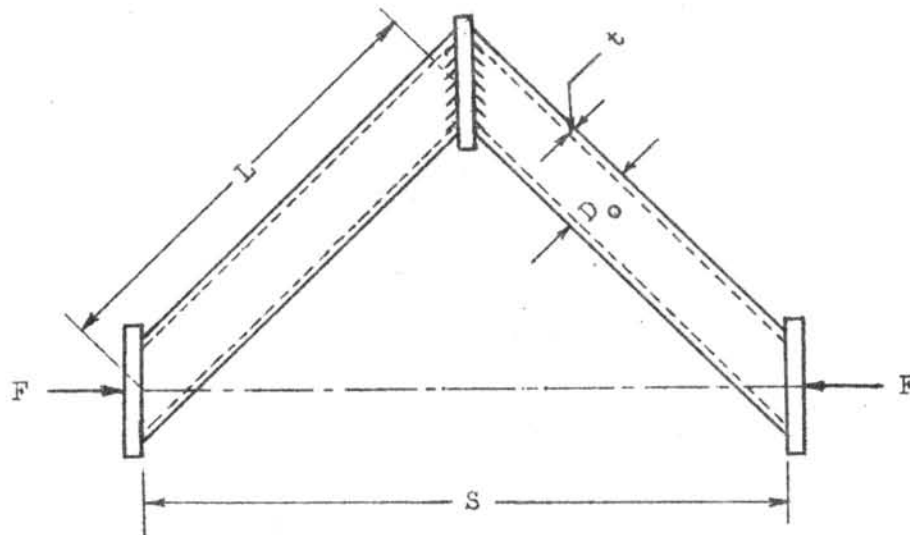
REINFORCED MITERED PIPE BEND.
